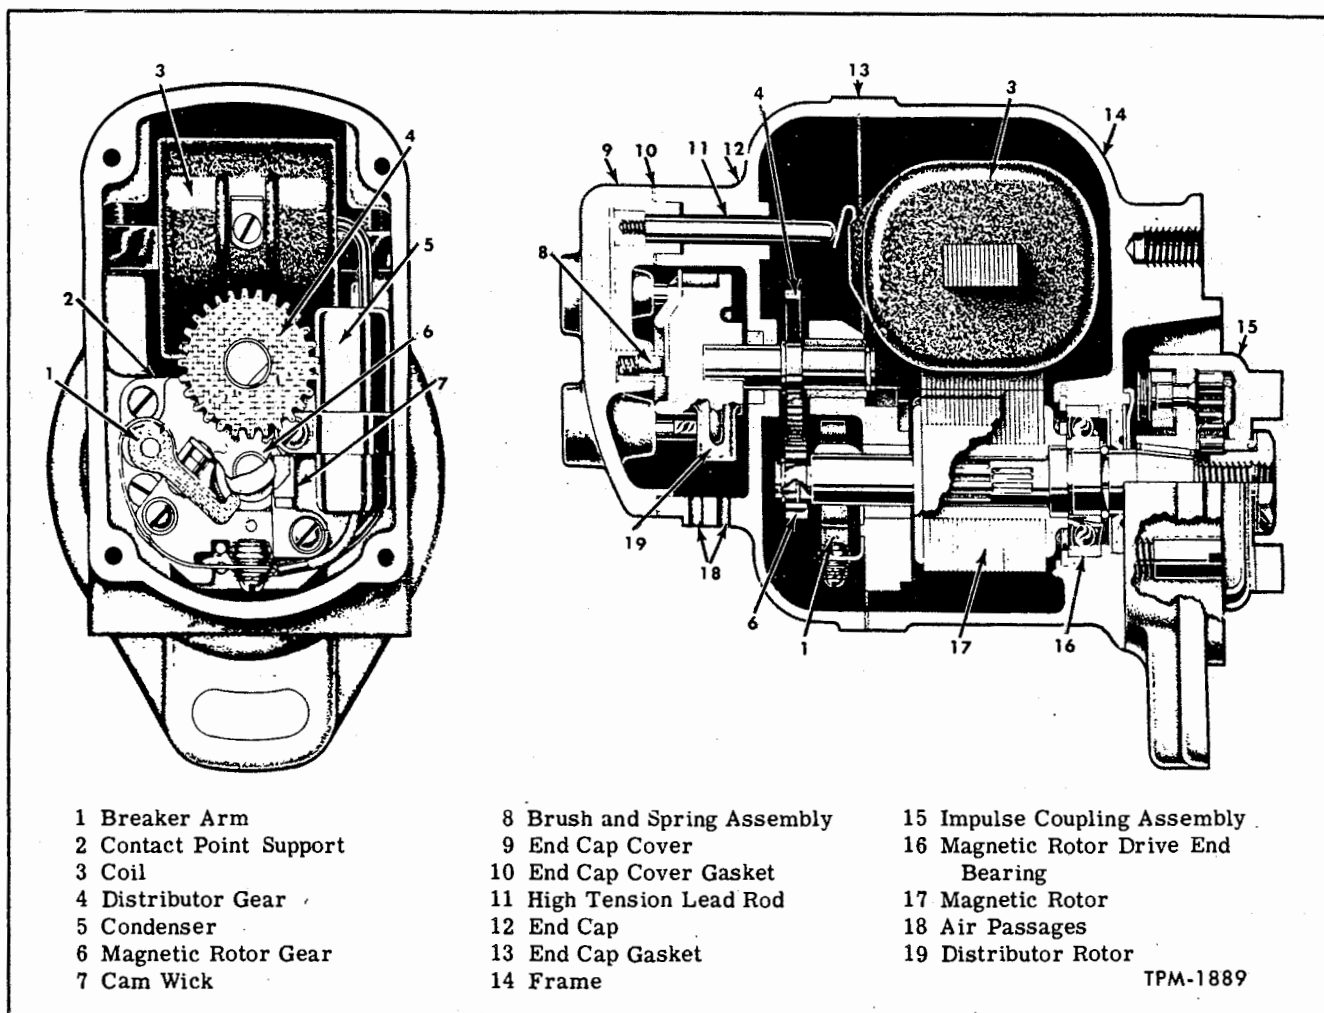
Magneto Cross-Section and End View with End Cap Removed
